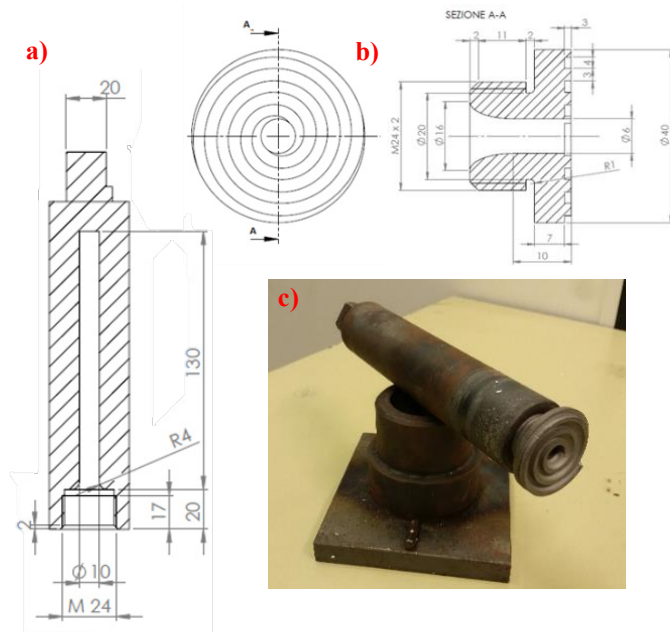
a) Section of the rotating plunger; b) front view and section of the inserted rotational punch head; c) Complete set of components for FSE tests.
